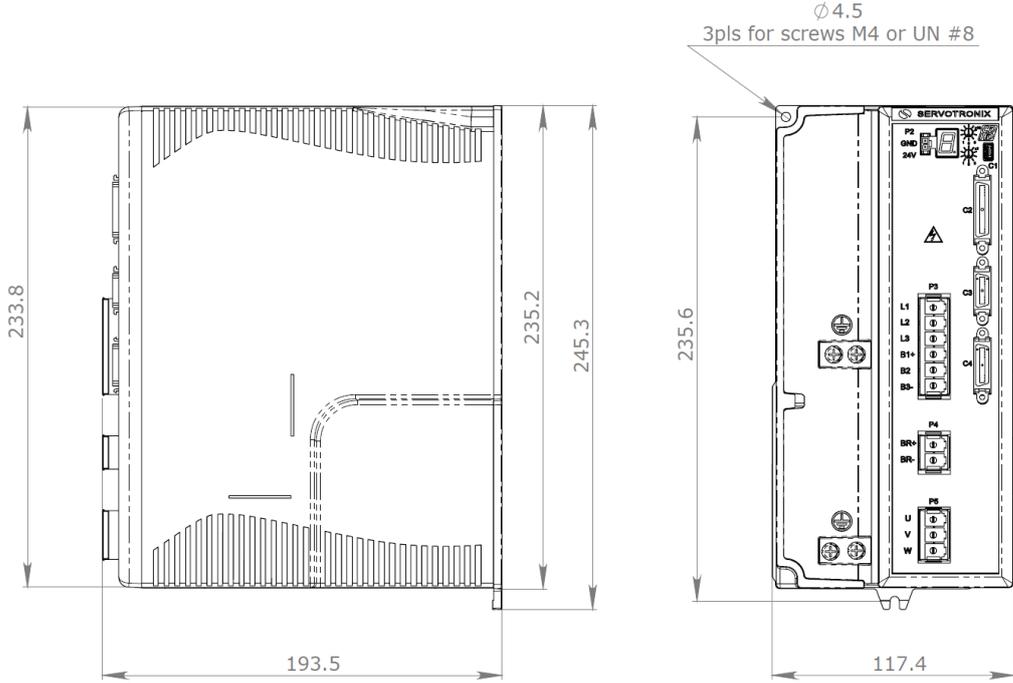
FLEXI PRO-012 – 400/480 VAC – Dimensions (mm)
